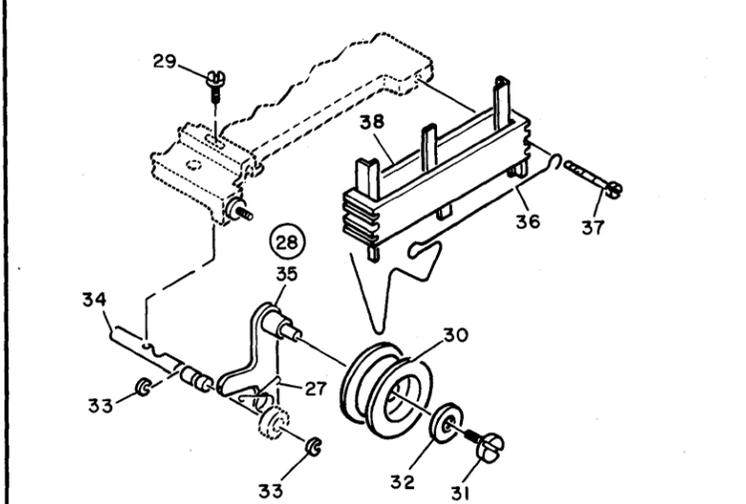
BASE PLATE ASSEMBLY--ANGLE MOUNT. SEE LIST 9.
